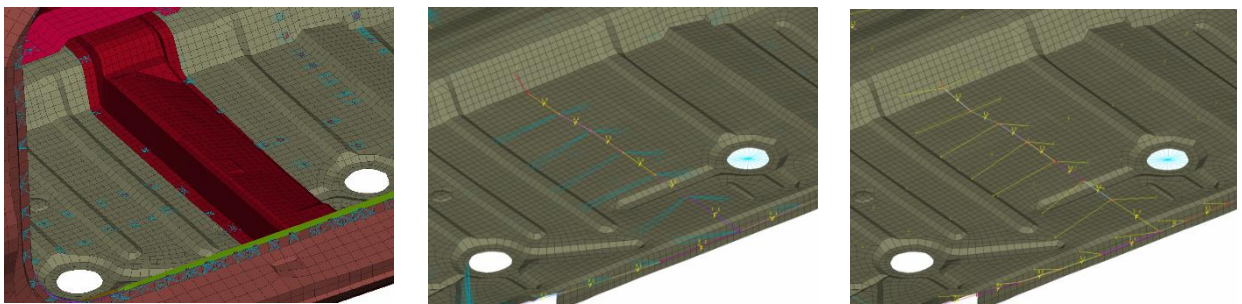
Original, RBE3 and RBE2 connections of Beams to Panels
